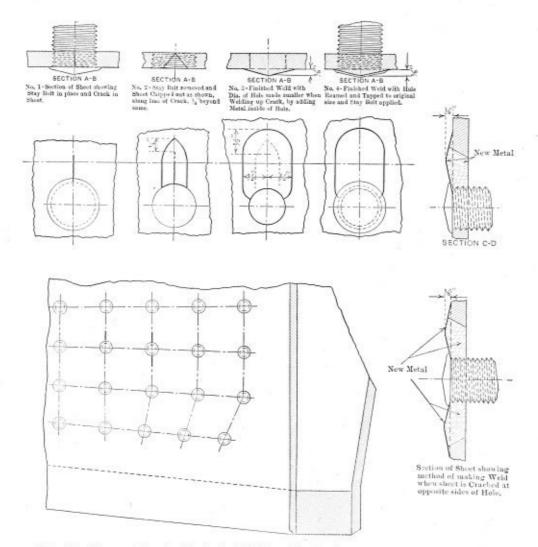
Diagram Showing Method of Welding Up Cracks at Staybolt Holes in Firebox
